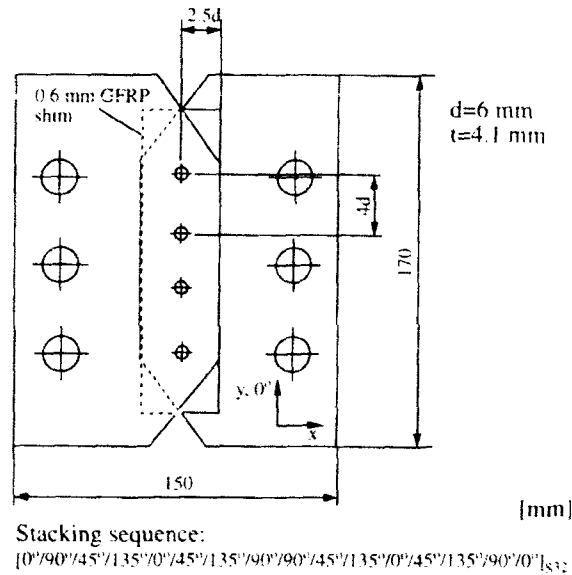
Specimen A: Shear loaded joint with a single row of fasteners.
